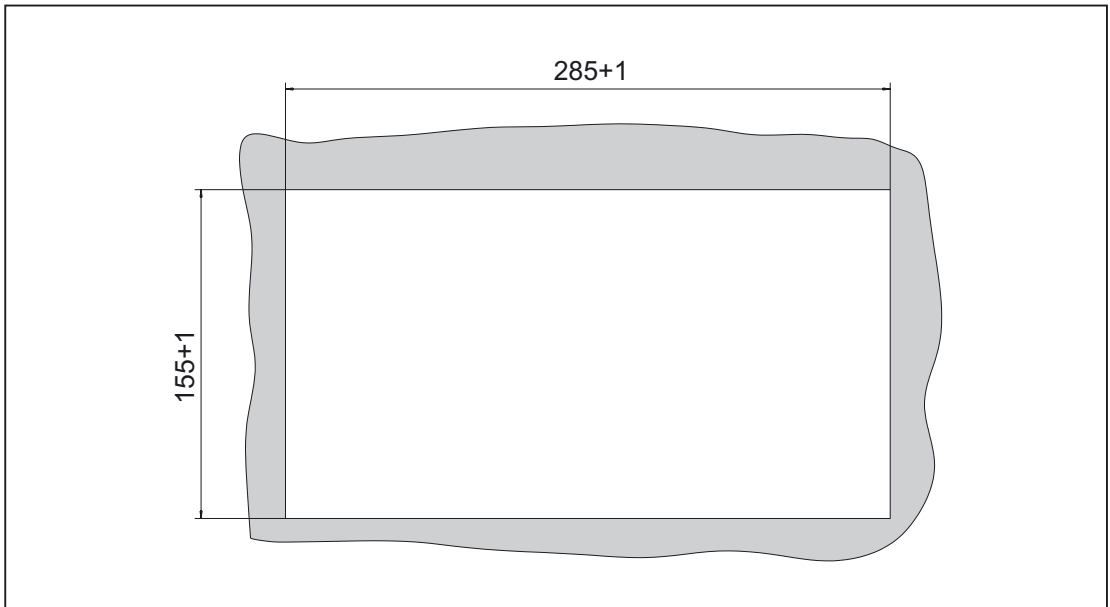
Panel cutout for CNC full keyboard KB 310C (plate thickness 1.5 - 6.0 mm)
